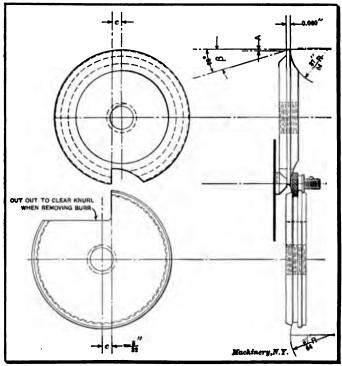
Circular Forming and Out-off Tools for Making Thumb-screw shown in Fig. 18
